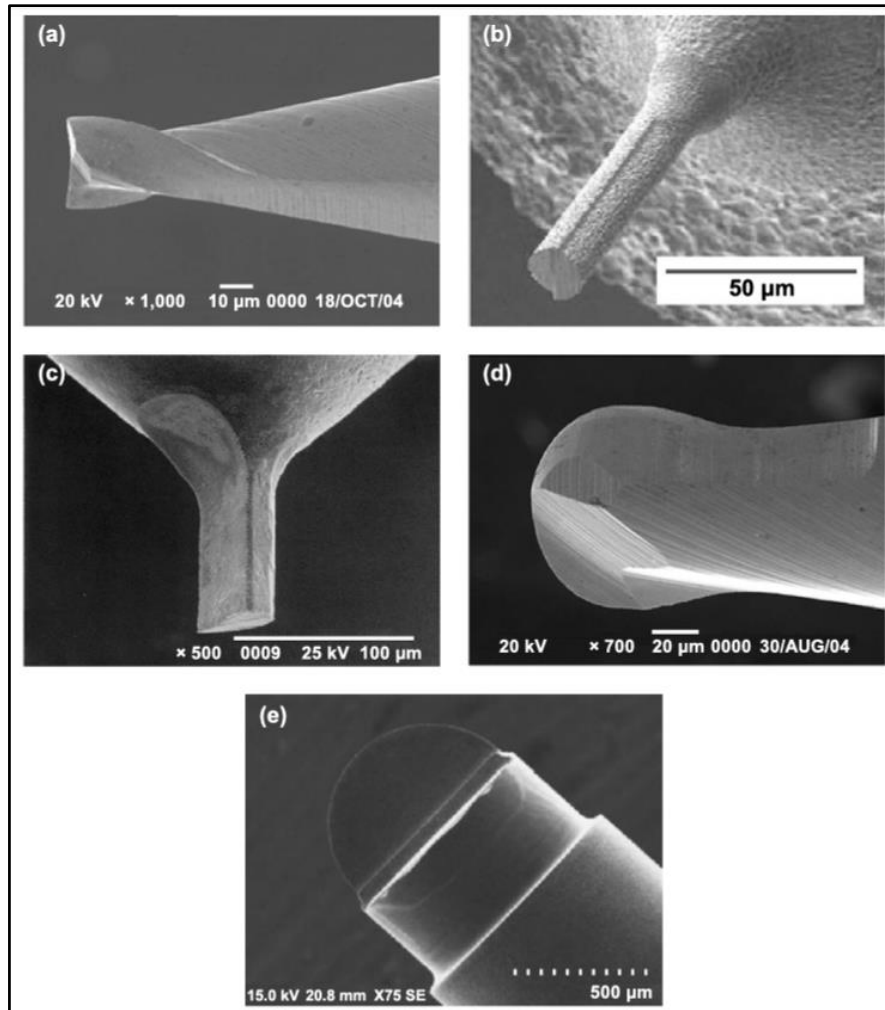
Different cutting tool used in micro milling tool. ^[22]
